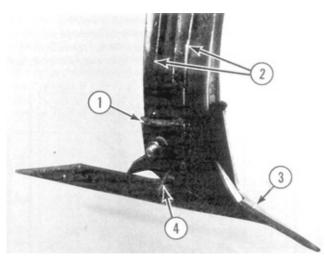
John Shearer Seed Boot: (1) Seed Boot, (2) Secondary Outlet Tubes, (3) Sweep, (4) V-shaped Spreader.
